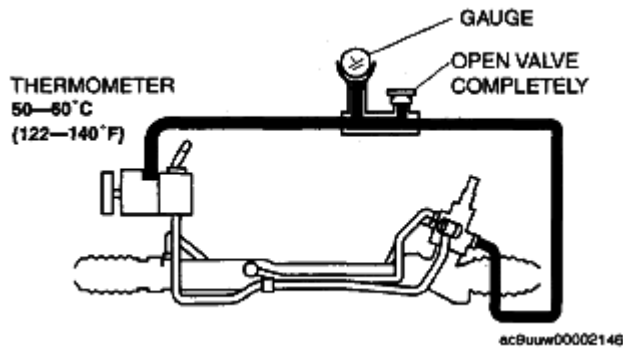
Measuring Fluid Pressure Generated At Gear Housing
